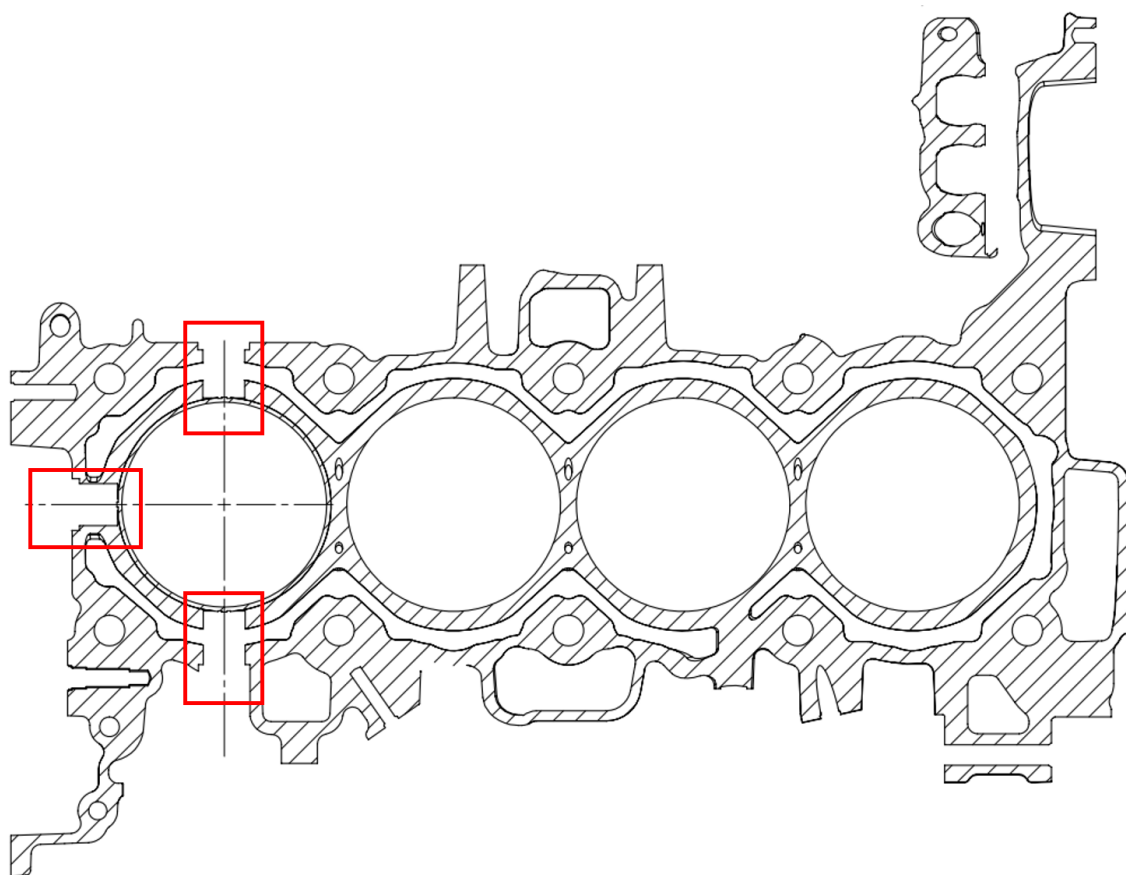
Engine block cross-section highlighting the three machined slots on Cylinder 4.
